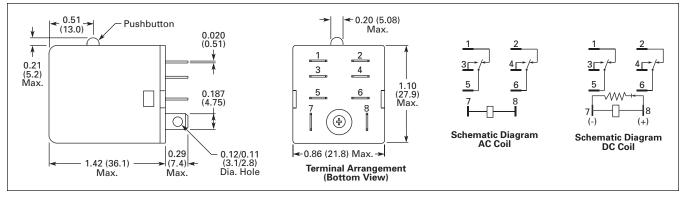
D7PR23 — Approximate Dimensions in Inches (mm)
